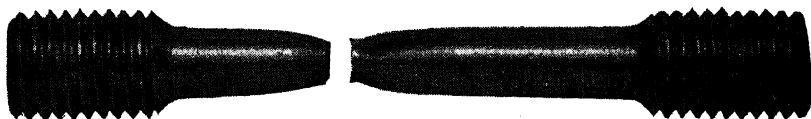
Typical tensile test specimen of shielded arc weld metal showed tensile strength of 76,100 lbs. per sq. in.; elongation in 2" of 25.8%; reduction in area of 48%.
